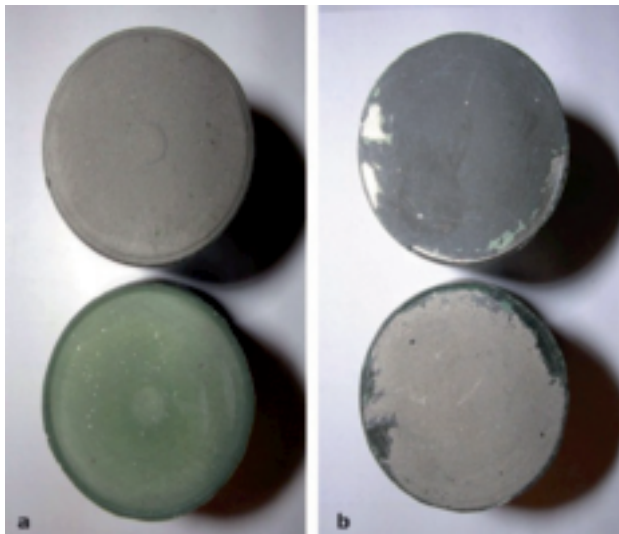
Specimens surfaces after the adhesion test: a) WC sample; b) Cr₂O₃ sample.
